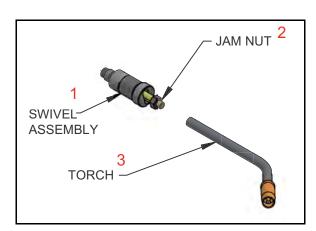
TORCH AND SWIVEL ASSEMBLY
